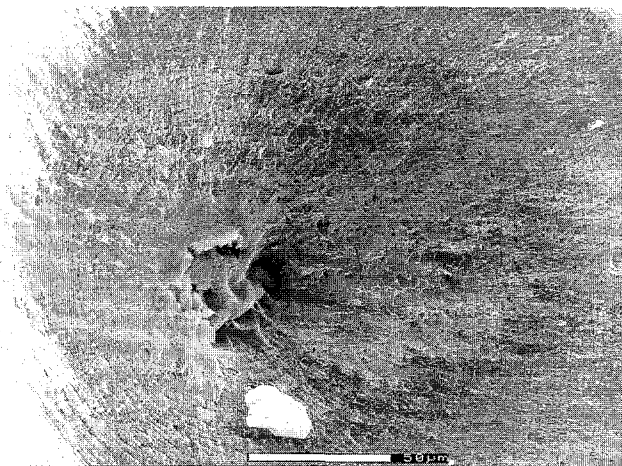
Striations on the fracture surface of sample 9, showing an example of a secondary crack in the plane of the main cracking event
